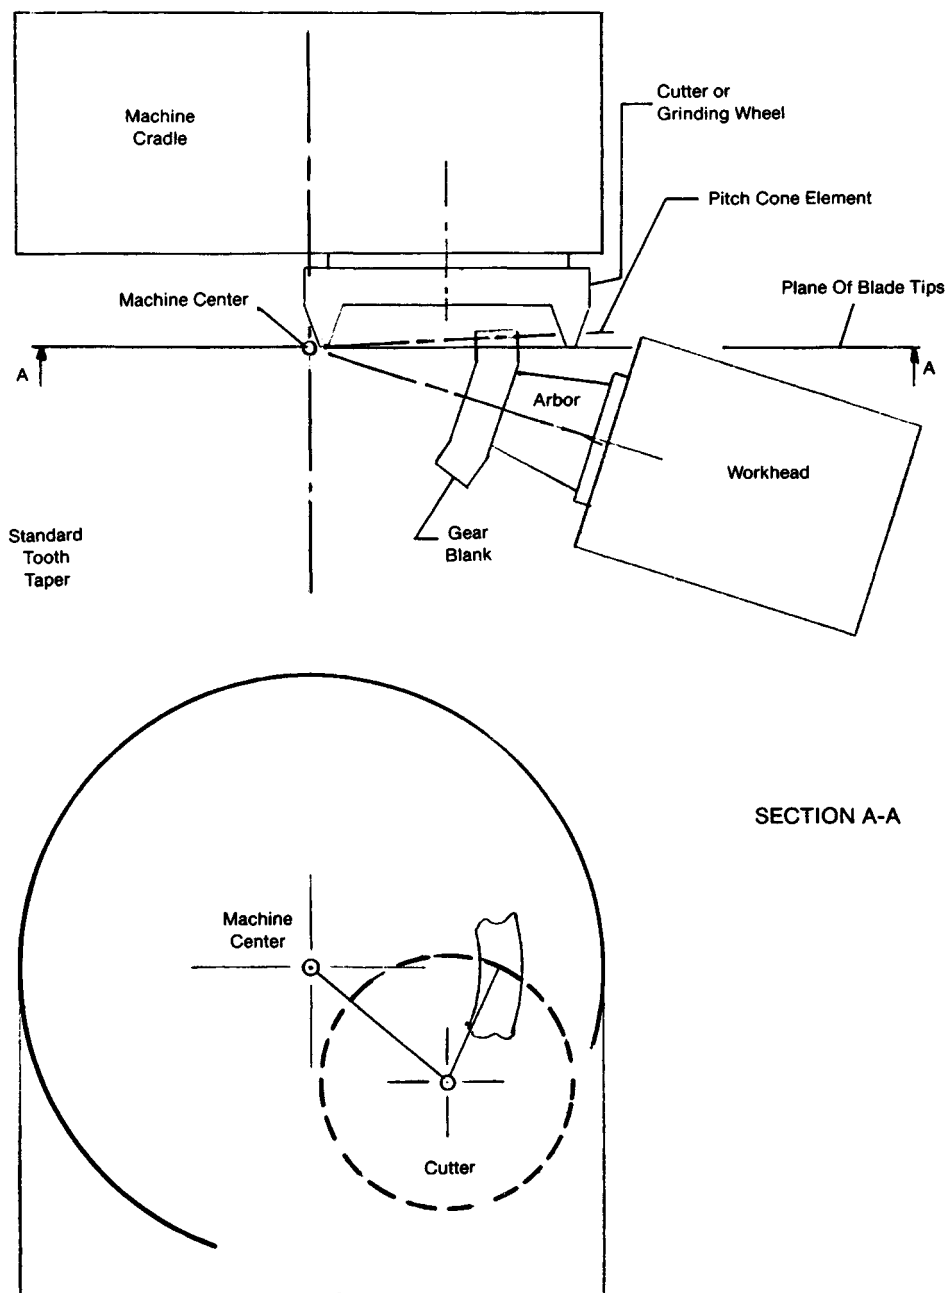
Basic machine setup of spiral-bevel face-mill generator.
